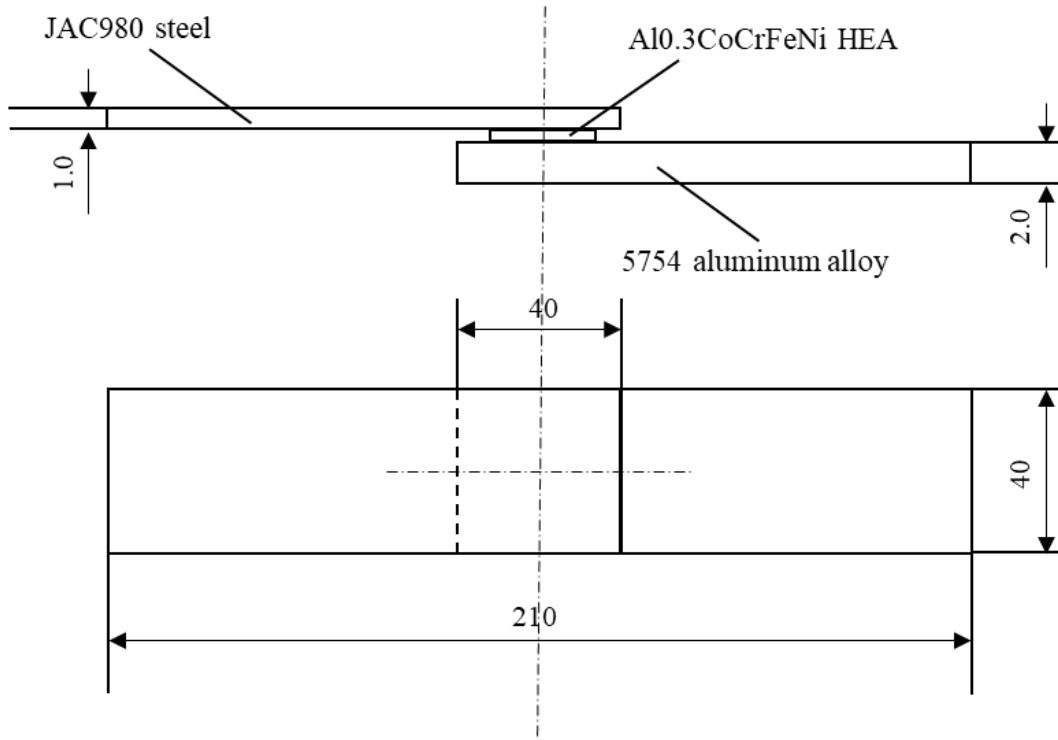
Geometry and dimensions of specimens for welding (not to scale, dimensions in mm)
